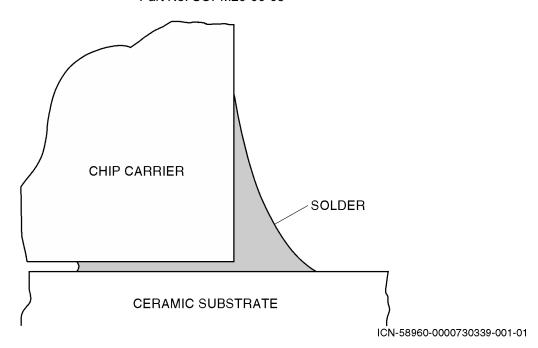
Cross Section of SMT Chip Carrier Solder Joint
